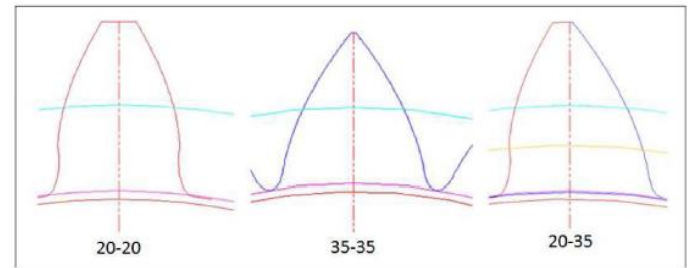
Change in Tooth Flank and Top land Thickness w.r.t Pressure Angle
